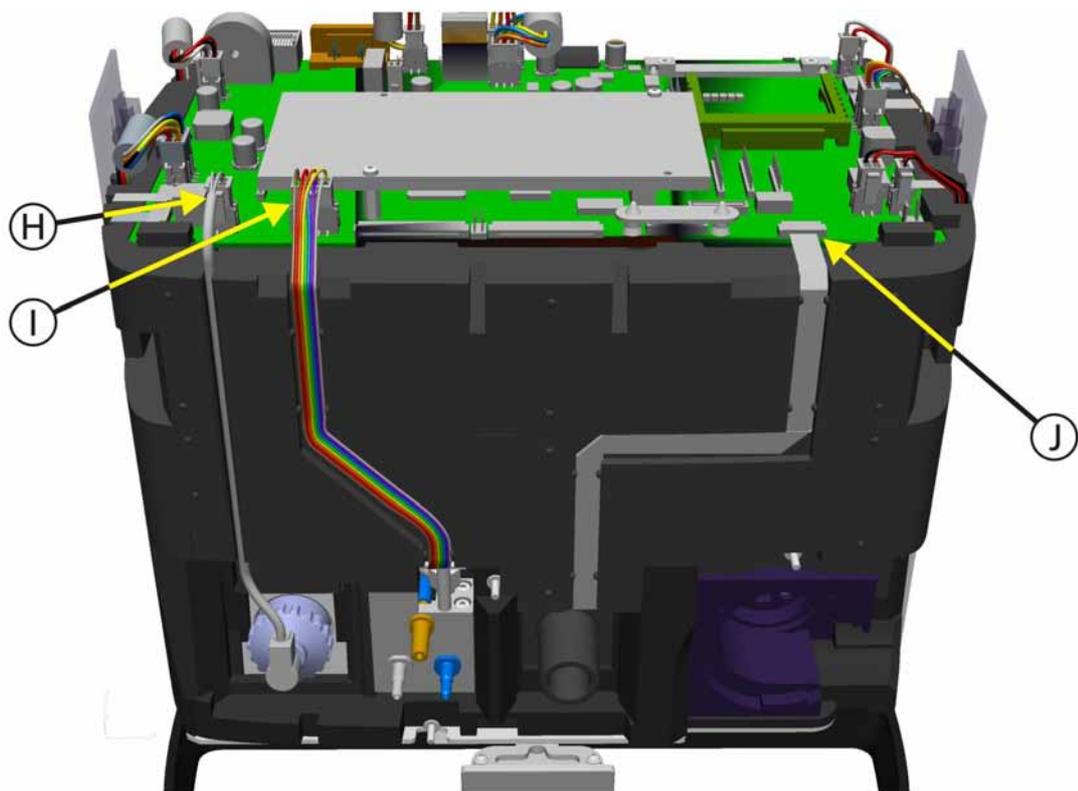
Top Foam Section and Mainboard Assembly, Step 4
